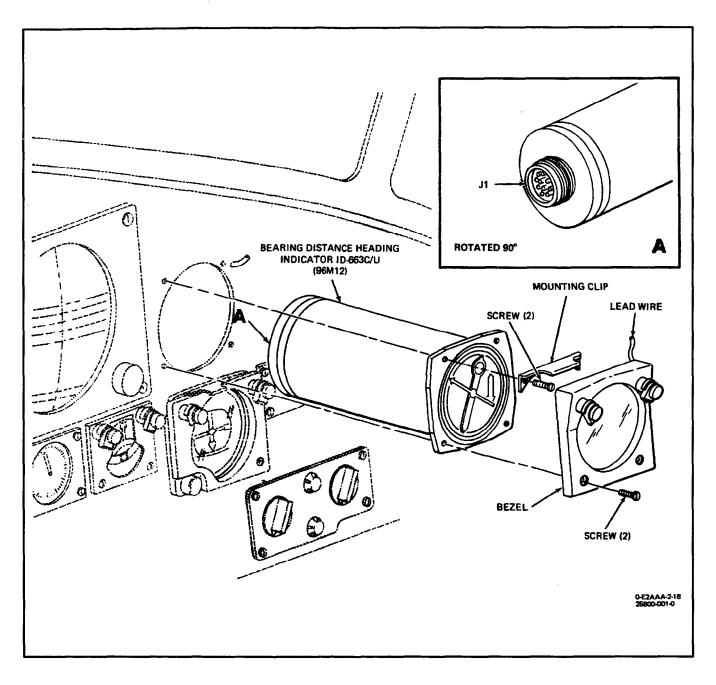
Removal and Installation of Bearing Distance Heading Indicator ID-663C/U
